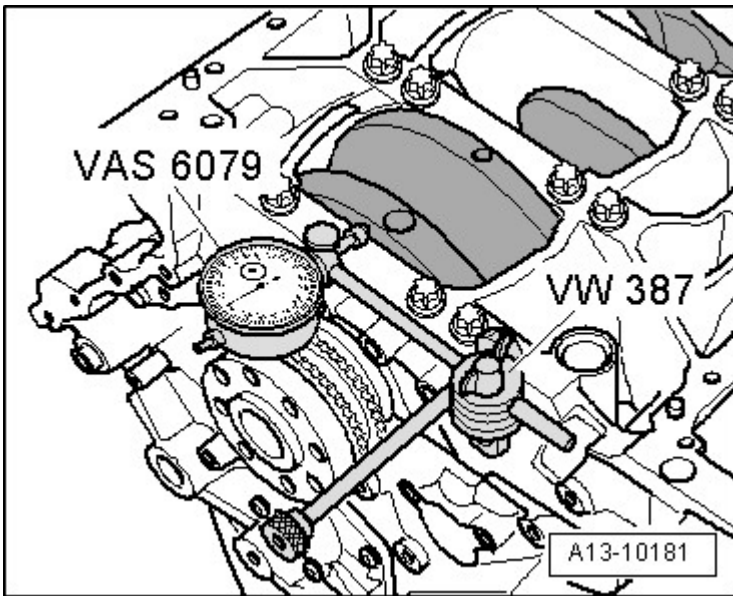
Identifying Special Tools - Dial Indicator VAS 6079 With Dial Gauge Holder VW 387
